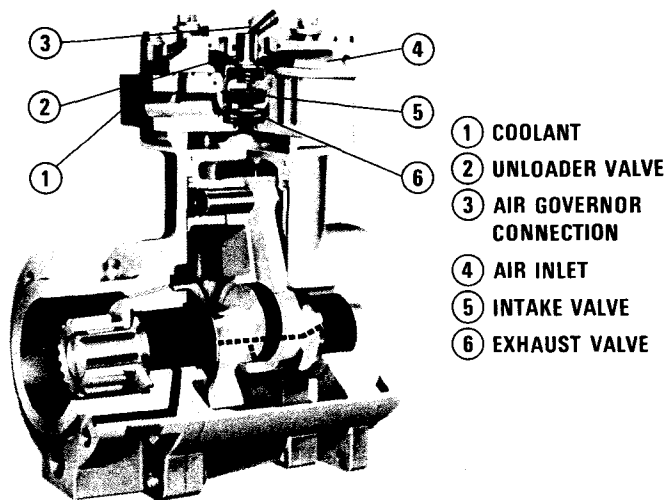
, (AWC-10). Cummins air compressor (single cylinder)
